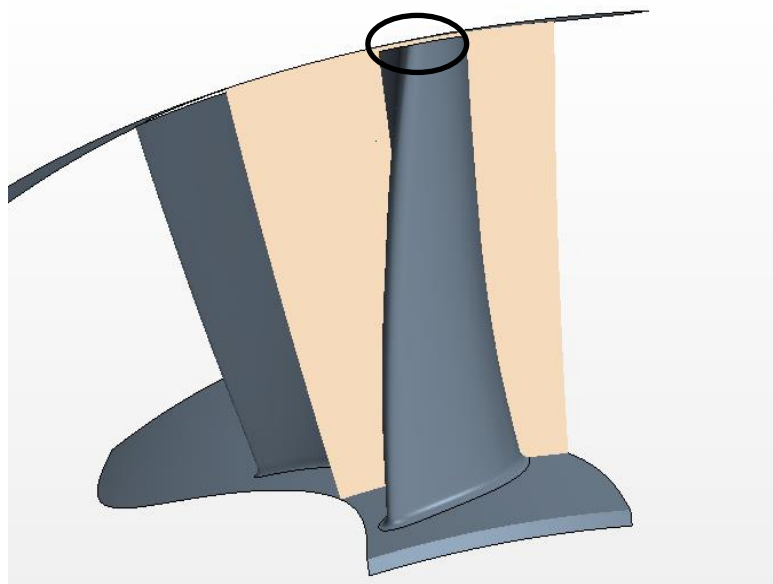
Tip clearance (highlighted) between rotor blade and casing
